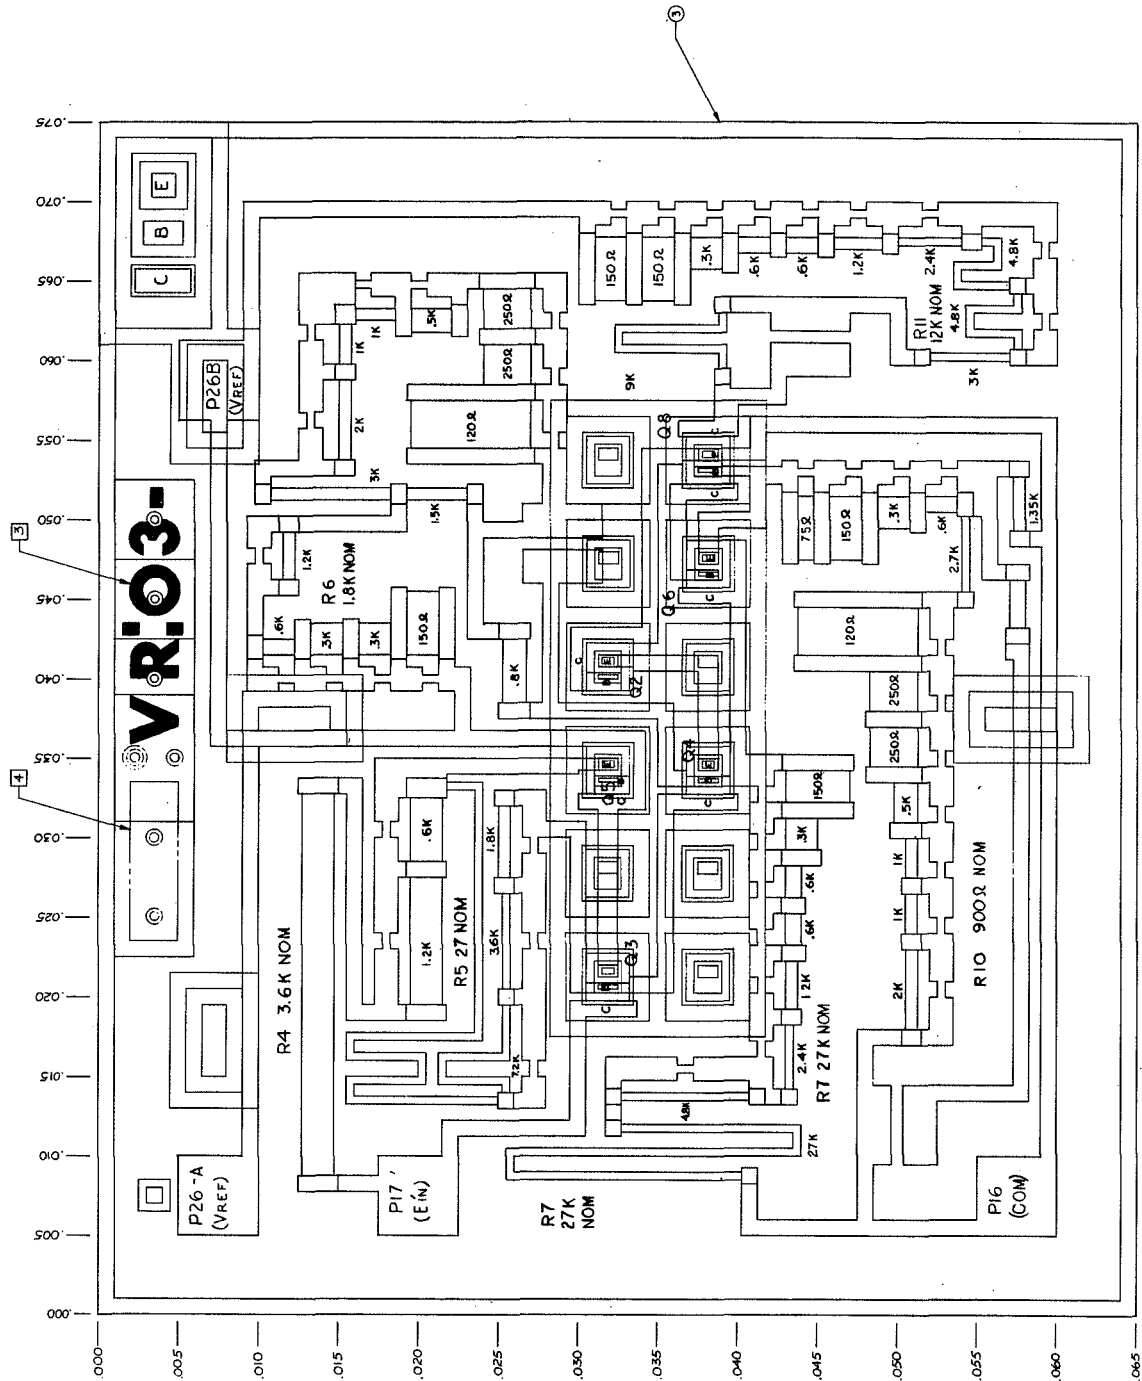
Voltage Regulator (VR03) Assembly Drawing
